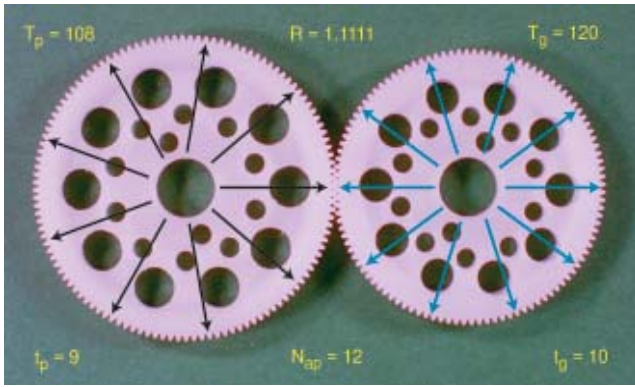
Mesh on a 108-tooth pinion and 120-tooth gear exhibits 12 assembly phases. The teeth of one assembly phase are marked.
